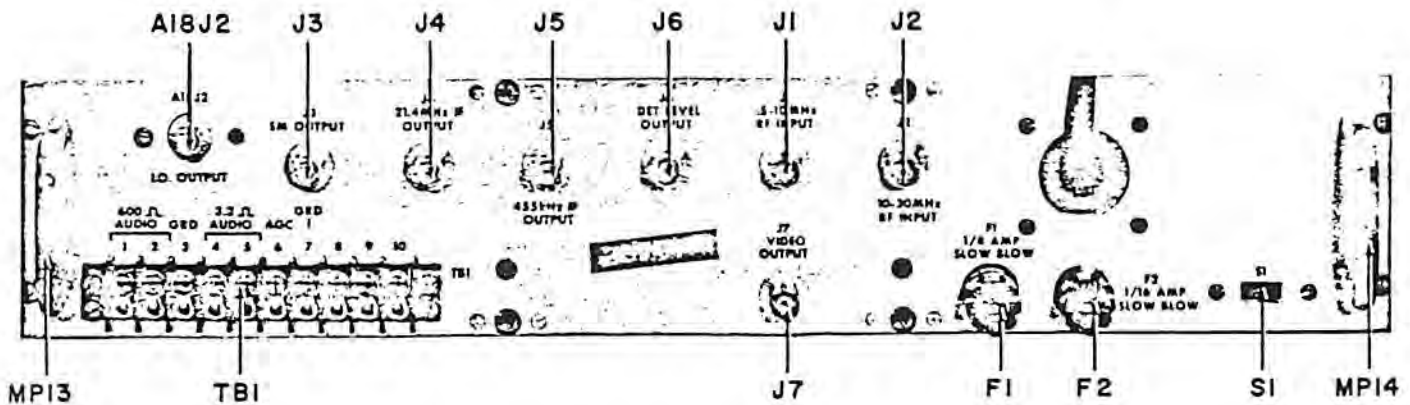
Location of Mechanical Parts, Type 373A Receiver, Rear Apron
